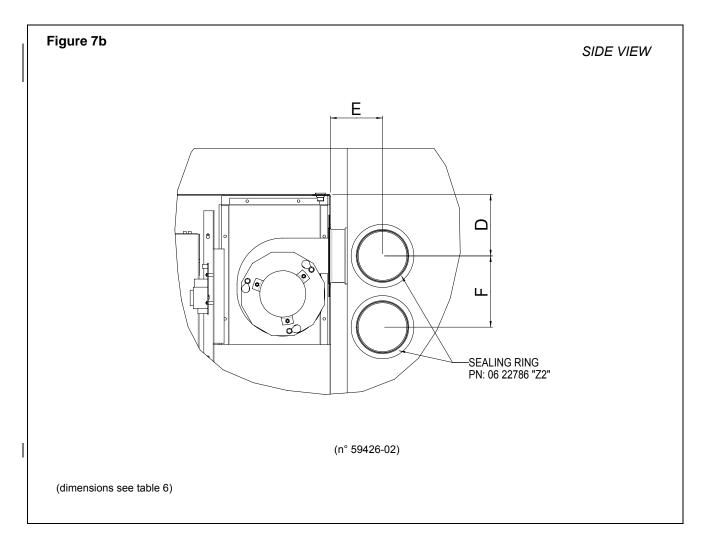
indicates the hole size required in the outer casing and the position of these holes relative to the mounting flange of the RHC 4000 DJL heating module.
